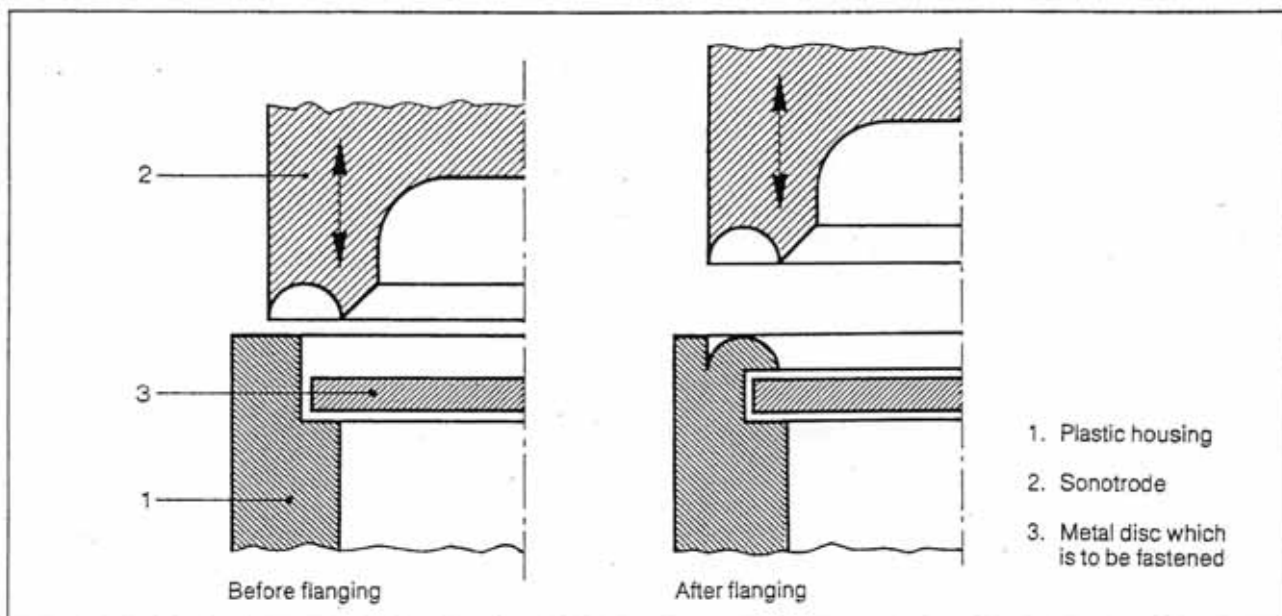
Internal flanging, fastening a metal disc in a plastic housing.
